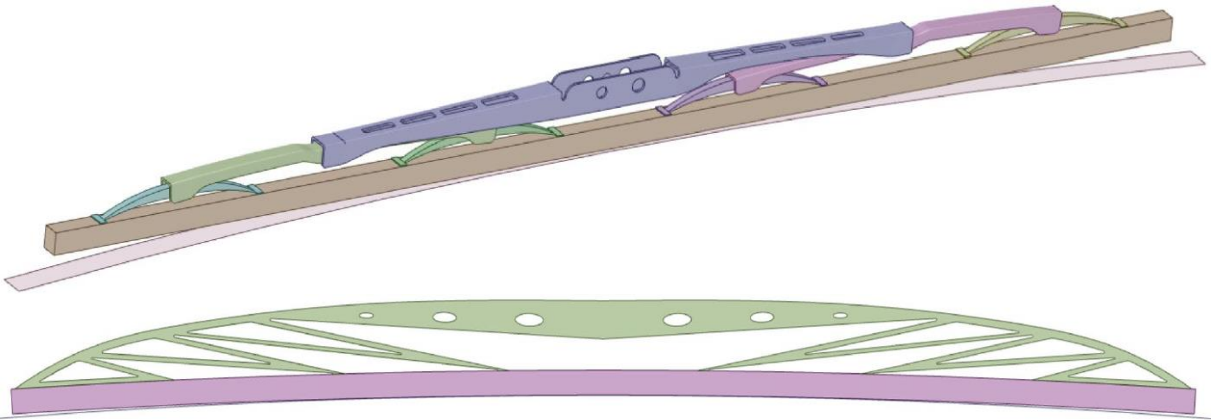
CAD models of traditional windshield wiper (above) and Flexsys single-component frame (below) [54]
